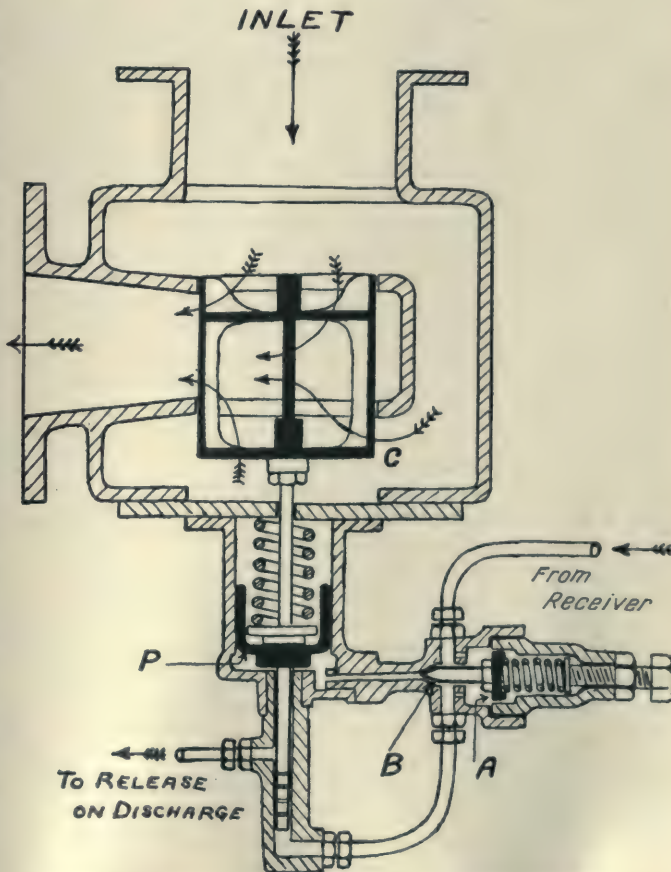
THROTTLE-VALVE CONTROL FOR "SENTINEL" COMPRESSOR.
